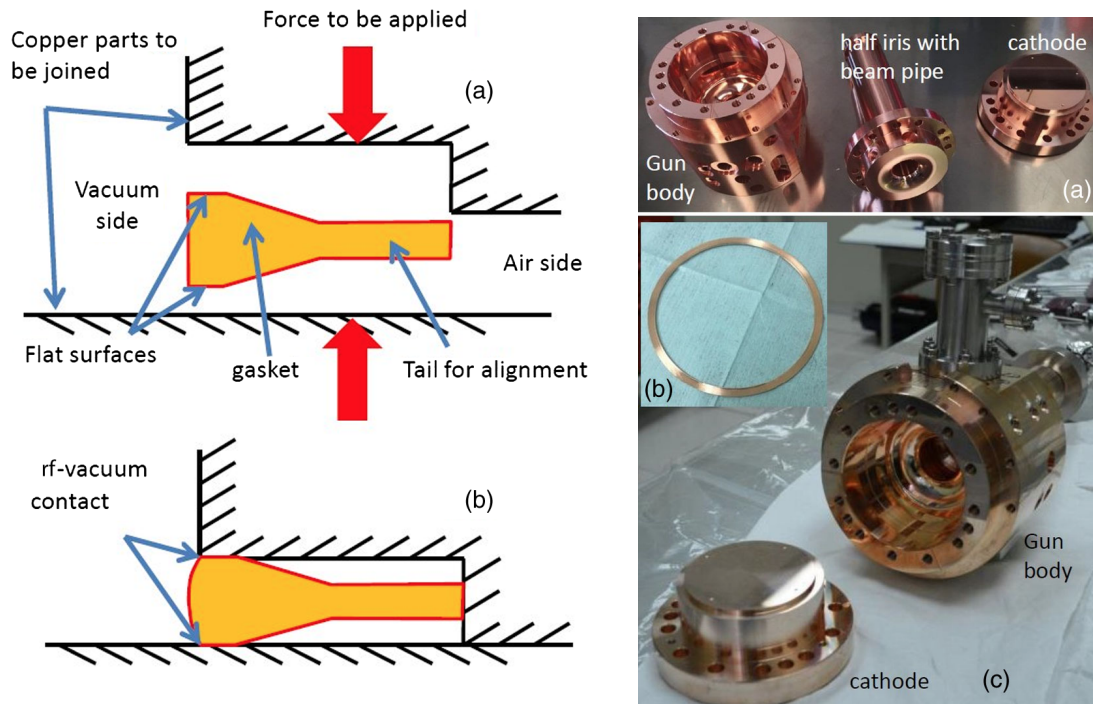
Left: Vacuum-RF gasket mechanism (a) uncompressed (b) compressed. Right: (a) Gun components before clamping (b) special gasket (c) gun assembly.
